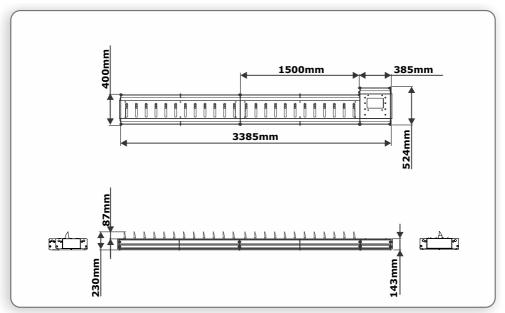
DIRECT DRIVE SURFACE MOUNT CLAWS OVERALL DIMENSIONS
